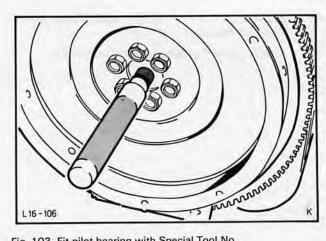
Fit pilot bearing with Special Tool No. 21–044/21–080
